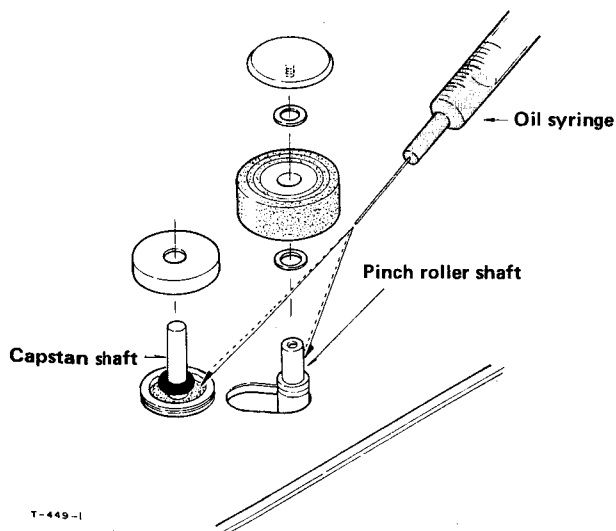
Capstan Shaft and Pinch Roller Shaft Oiling Points
